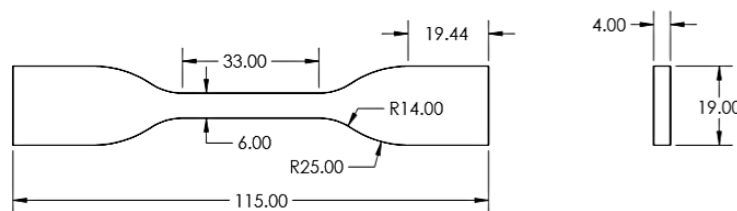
ASTM 638D Type IV sample size in millimeters.
